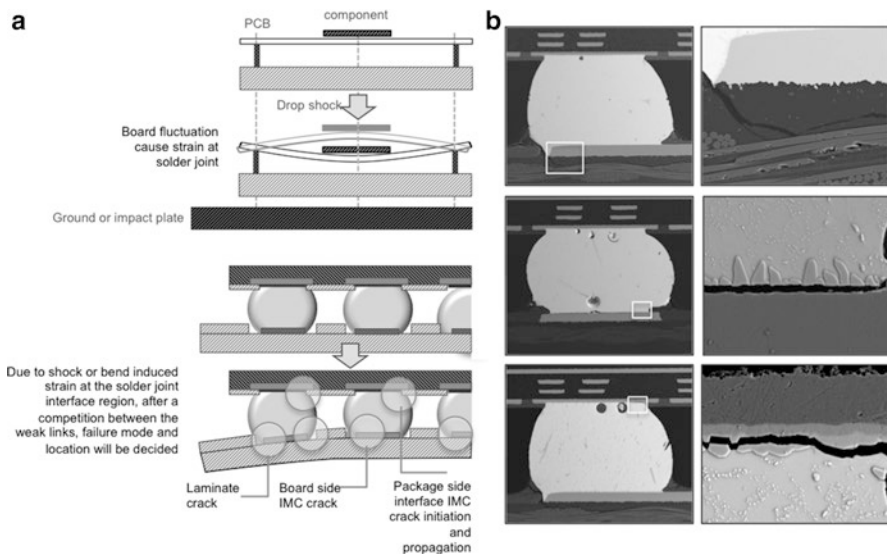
shows a schematic of a solder joint, which experiences various external forces and challenges. All of these external or internal sources affect the stability of the solder joint. Mechanical bending can occur during use of the device or board, but even before assembly to the chassis, a large PCB can be easily bent by mishandling (grapping the board at one corner, etc.). The bend can produce a significant strain at certain component corner joints and potentially induce fracture to the joint even before it is deployed to the field. A continuous cyclic bending condition is a potential risk to the solder joint stability since high cycle fatigue failure develops during a long period of time, making it more difficult to identify and mitigate. Thus, knowing how monotonic and cyclic strains affect the solder joints and the associated deformation mechanisms that are activated is important to correctly assess and predict the lifetime of the joint and in order to identify potential mitigation strategies that can delay the failure [10].
